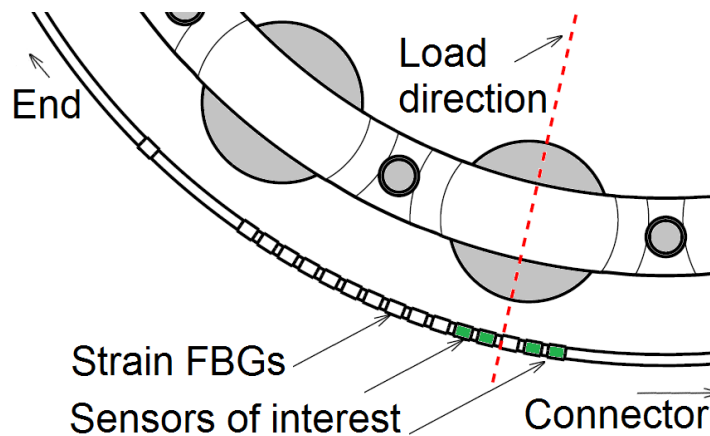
Gusto Bearing - Sensors of interest (green) for shown load condition (red)
